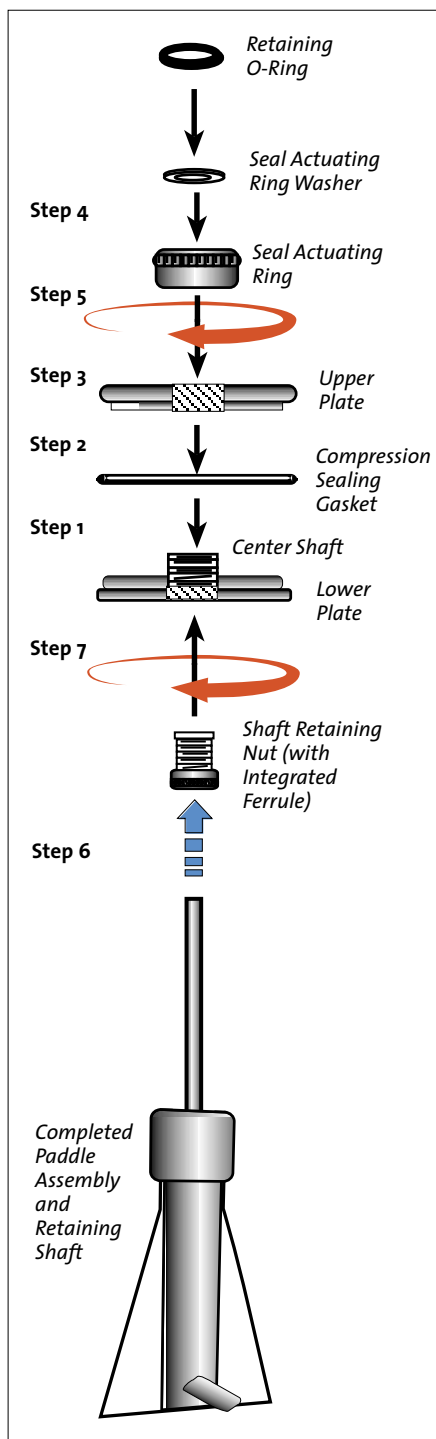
Magnetically Driven Shur-Loc Cap Assembly
